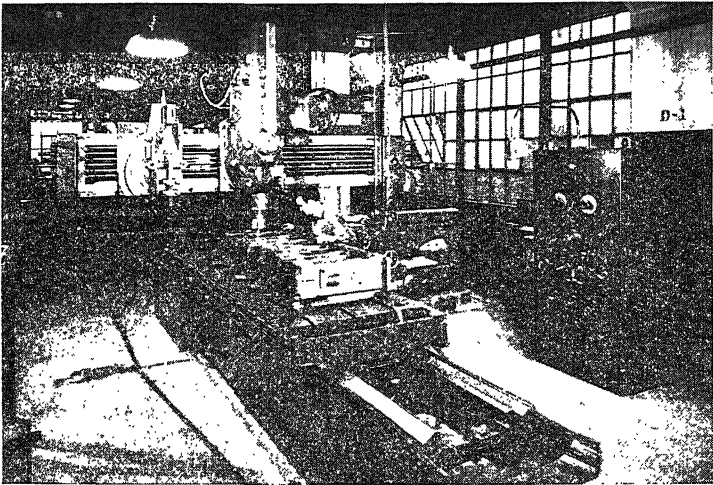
A job on a planer-milling machine for a first-class machinist. Surfaces must be exactly planed and milled, with holes and slots finished to size required. (Courtesy of The G. A. Gray Company.)
